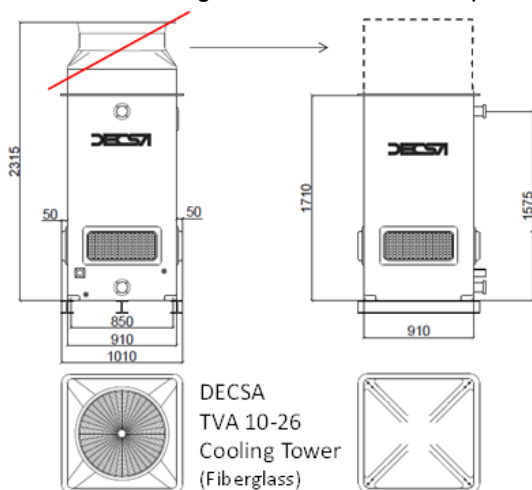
Fiberglass tower from DECSA that will be used to build the absorber and regenerator towers.
